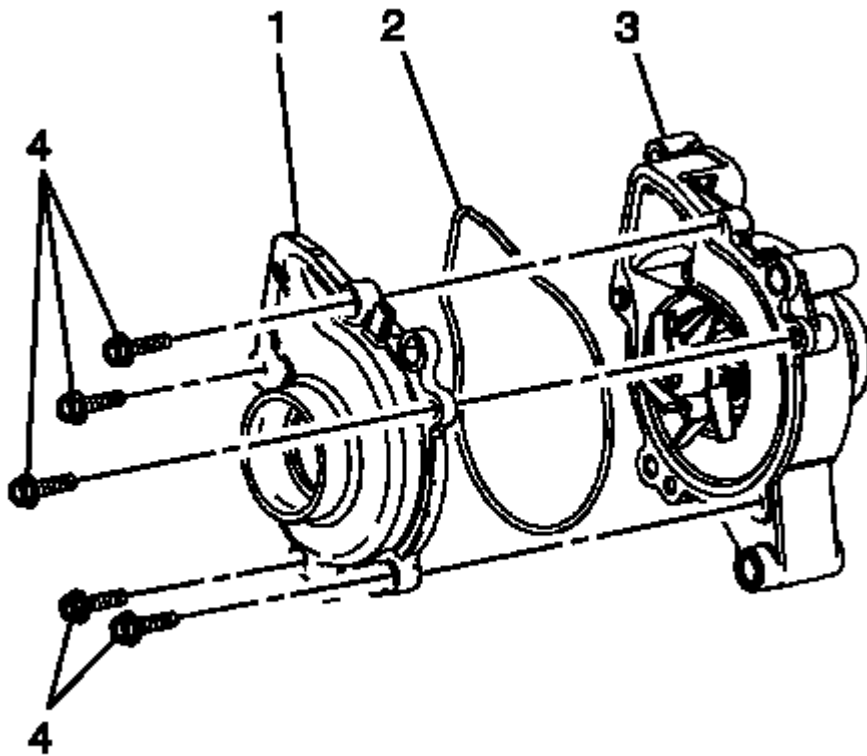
Water Pump, Water Pump Cover, Rear Cover Fasteners And O-Ring Seal
